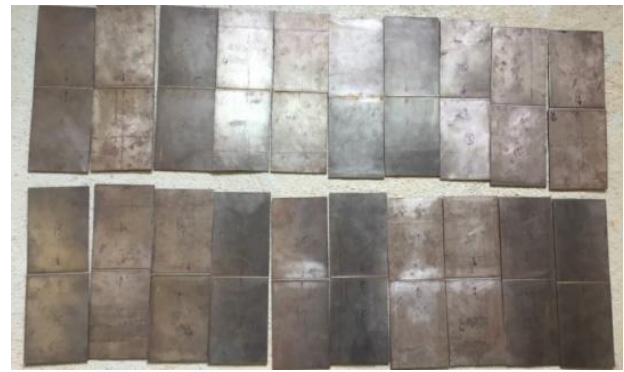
Welded joint samples of AISI 4130 steel
